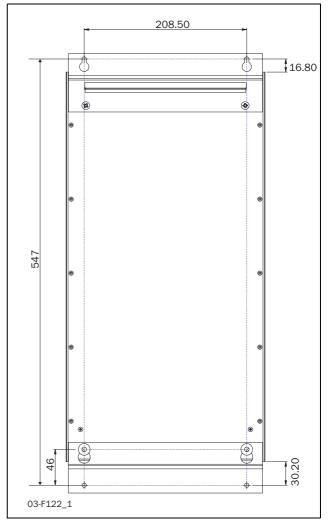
Hole pattern for MSF-170 to MSF-250 with upper mounting bracket instead of DIN rail.
